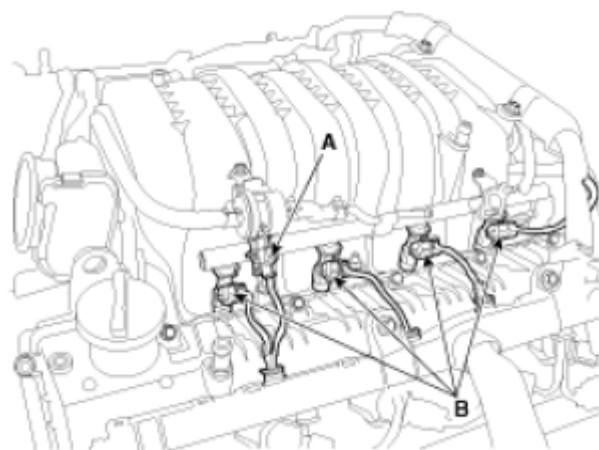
Identifying Purge Control Solenoid Valve Connector And Injector Connectors
